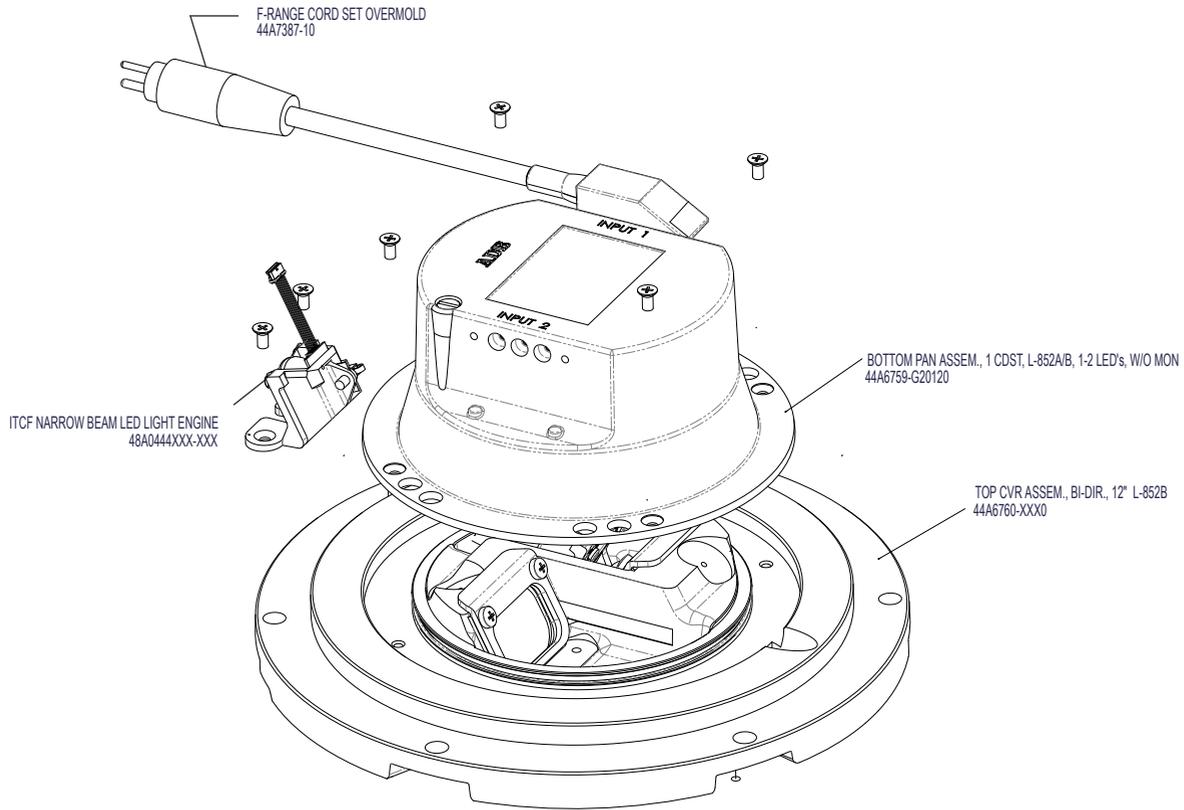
Typical 12" L-852D(L), Bi-Dir., Cordset Assembly Shown
